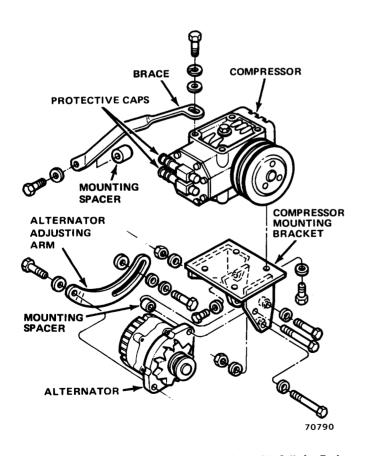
Compressor Mounting—1975-79 Pacer Six-Cylinder Engine
